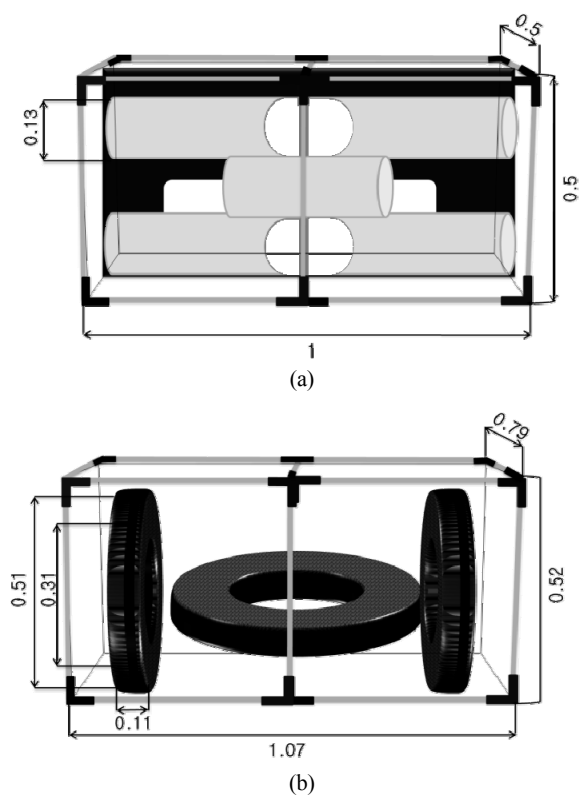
(a) A pipe-type shelter and (b) a tire-type shelter (unit: m).
